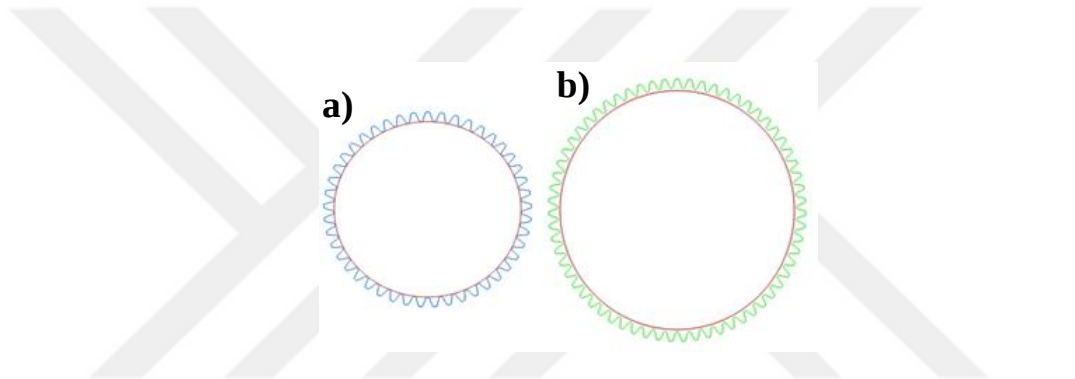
2D Gear Geometry of Gear Pair of 45 and 63: a) Pinion; b) Gear.
